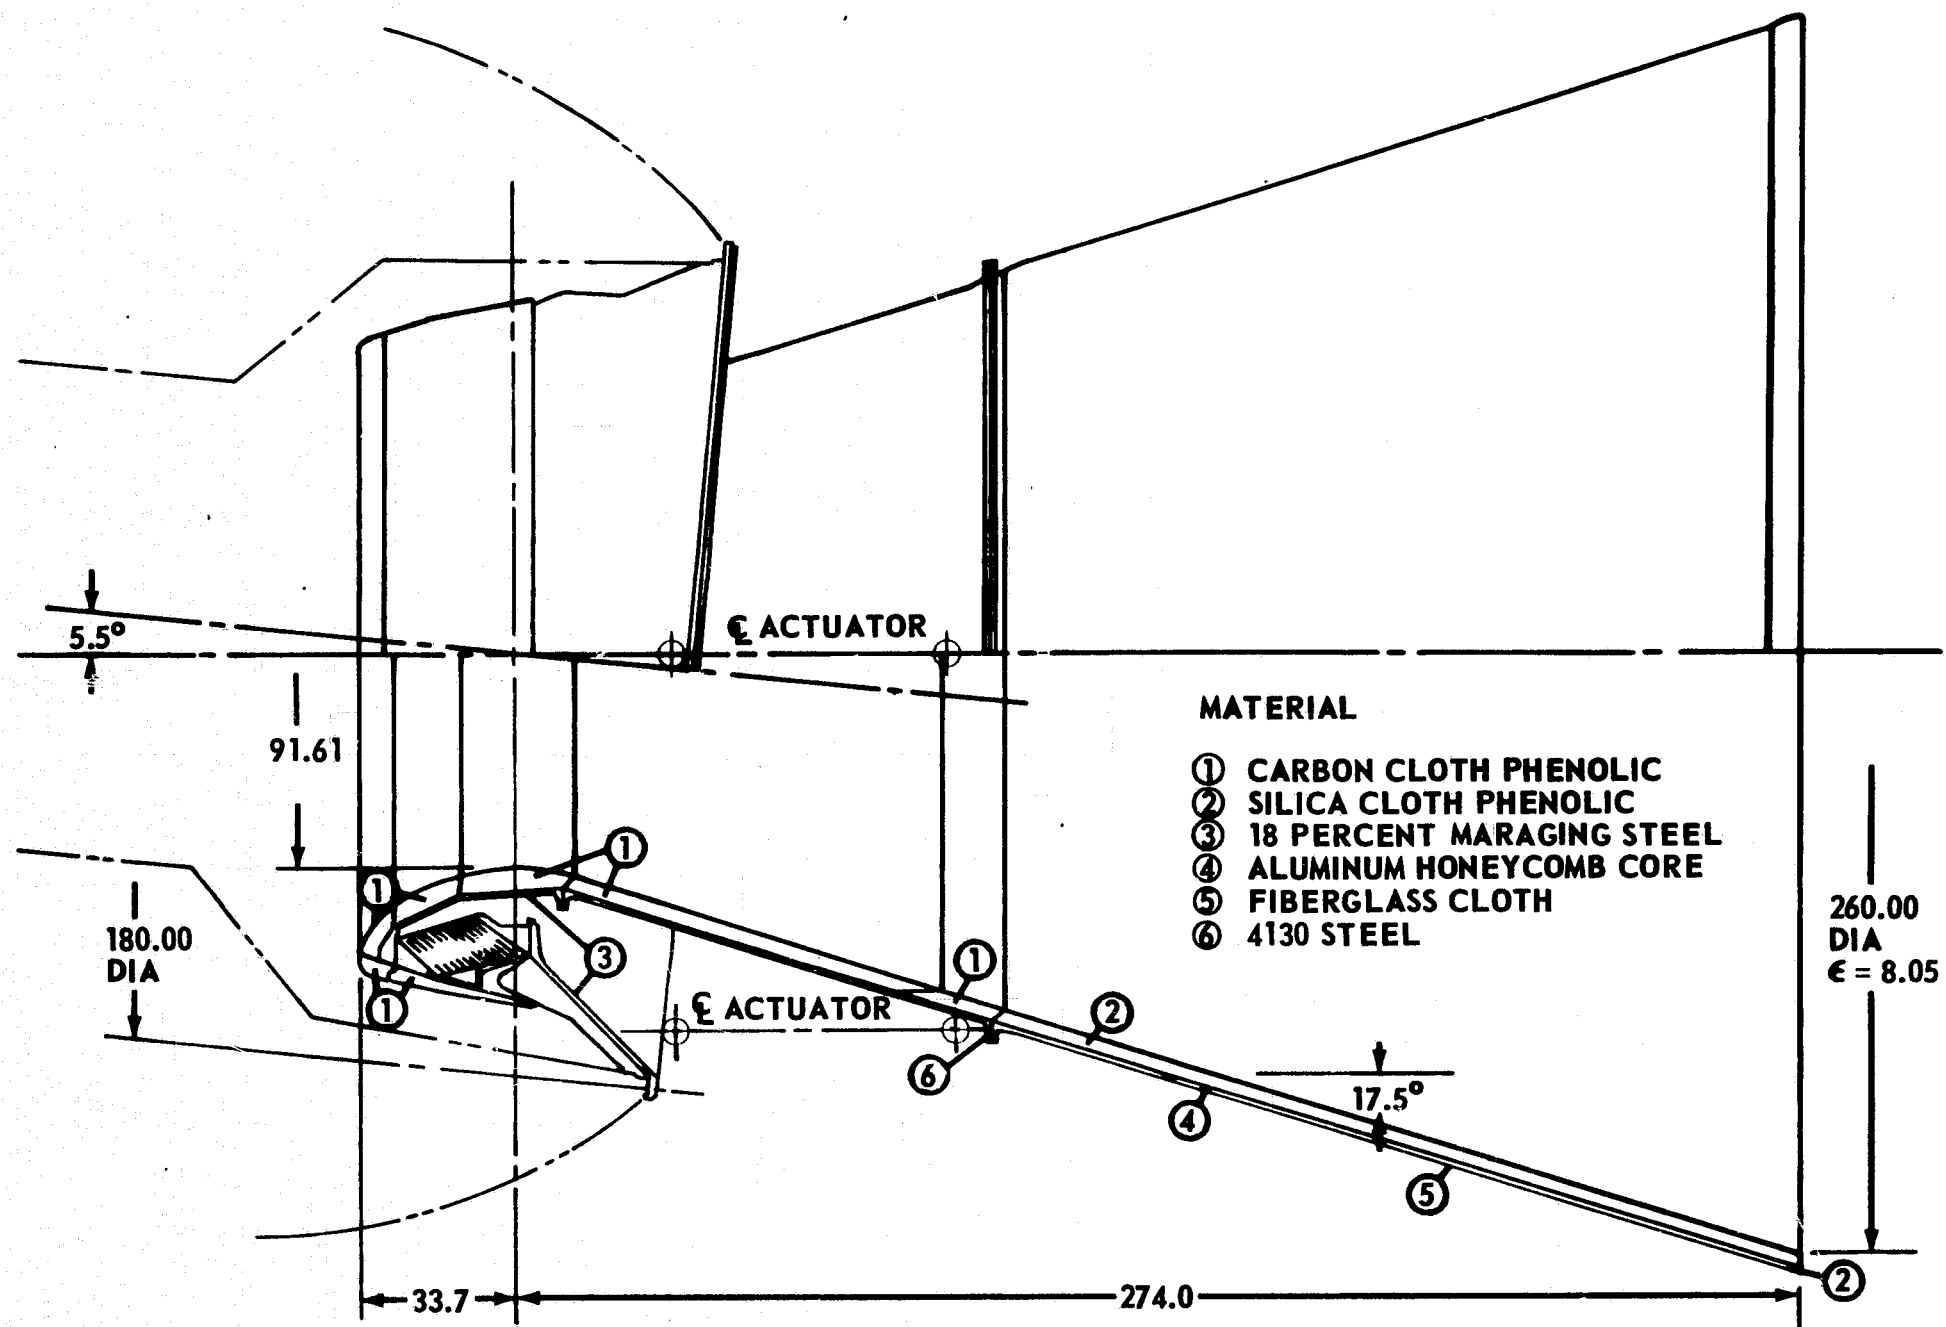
NOZZLE ASSEMBLY 260-INCH MOTOR
